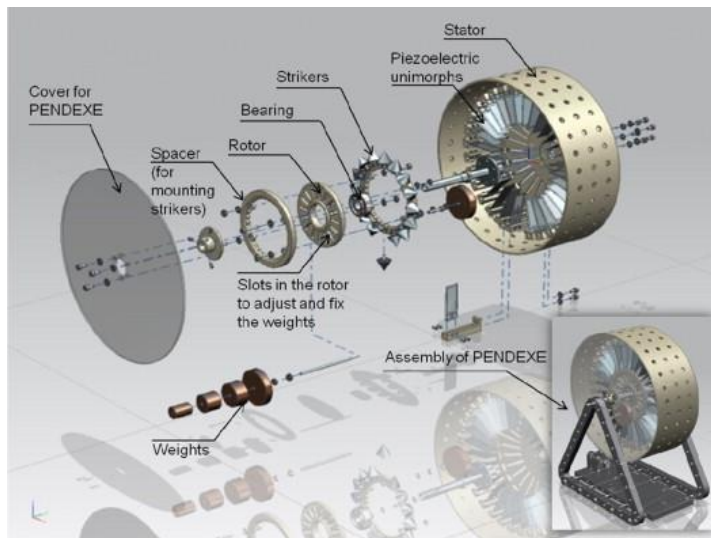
Assembly and exploded view of pendulum excited piezoelectric harvester [44]
